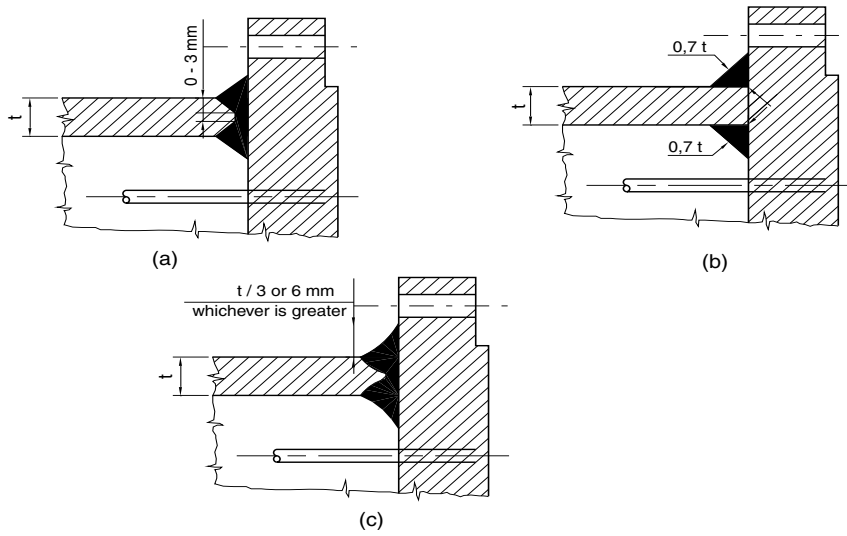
Types of joints for tubesheets to shells (butt welded)
